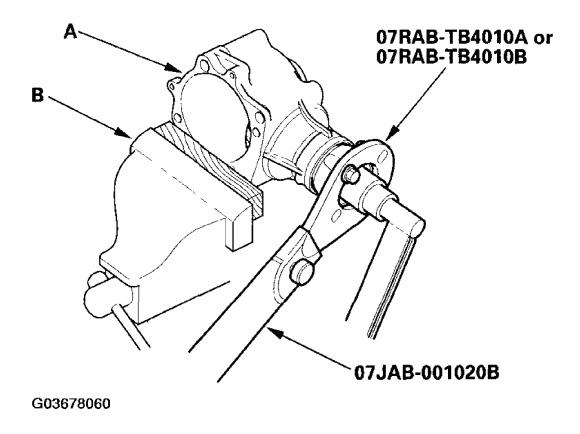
Securing Transfer Housing In Bench Vise With Soft Jaws Courtesy of AMERICAN HONDA MOTOR CO., INC.
